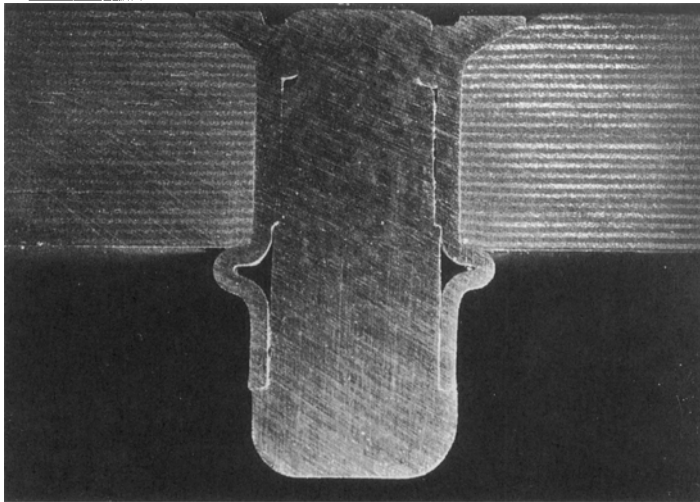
shows a COMPOSI-BOLT blind bolt which is a blind fastener with a pull-stem, single-action and single sleeve bulbing action on the blind side. It is designed specifically for composite structures. Large bearing area available in the 100° and 120° shear and tension head are suitable for composite applications. The HUCK-TIMATIC blind bolt is a titanium version of the single action UNIMATIC blind bolt. It is available with a CP titanium sleeve and an A286 pin or a 15-3-3-3 titanium pin which was designed specifically for use in composite structures.
